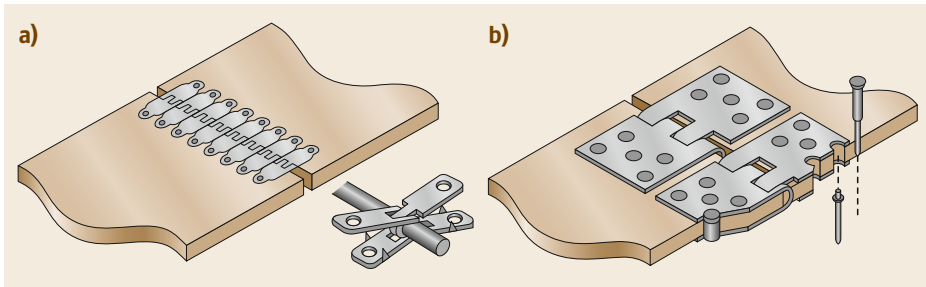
,b Mechanical fastening of conveyor belts using (a) hinged plate fastener and (b) riveted plate fastener [20.99]
